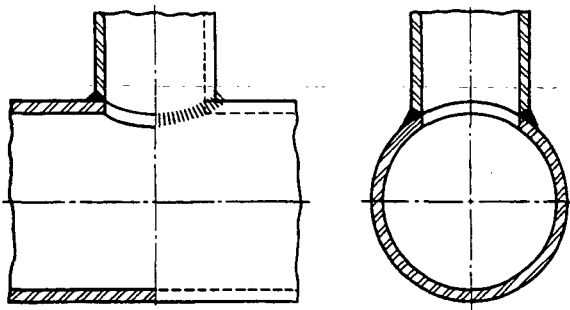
C TYPICAL WELDED ANGULAR BRANCH CONNECTION WITHOUT ADDITIONAL REINFORCEMENT
